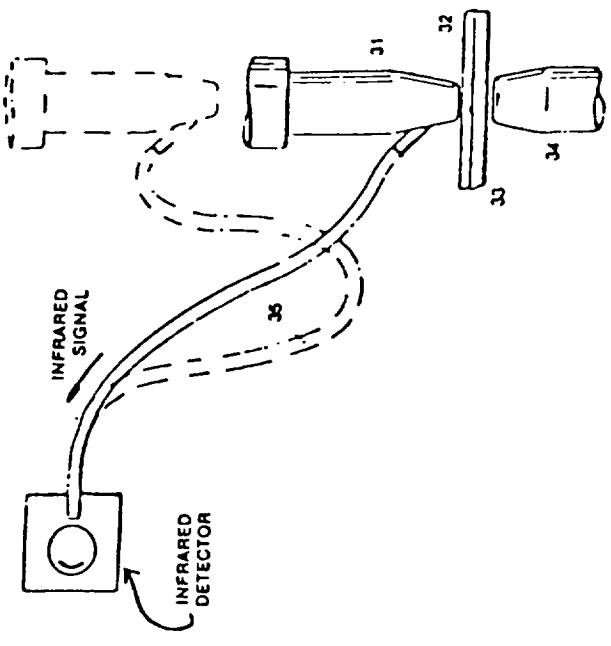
Detail of spot weld electrodes with fiber optics.
